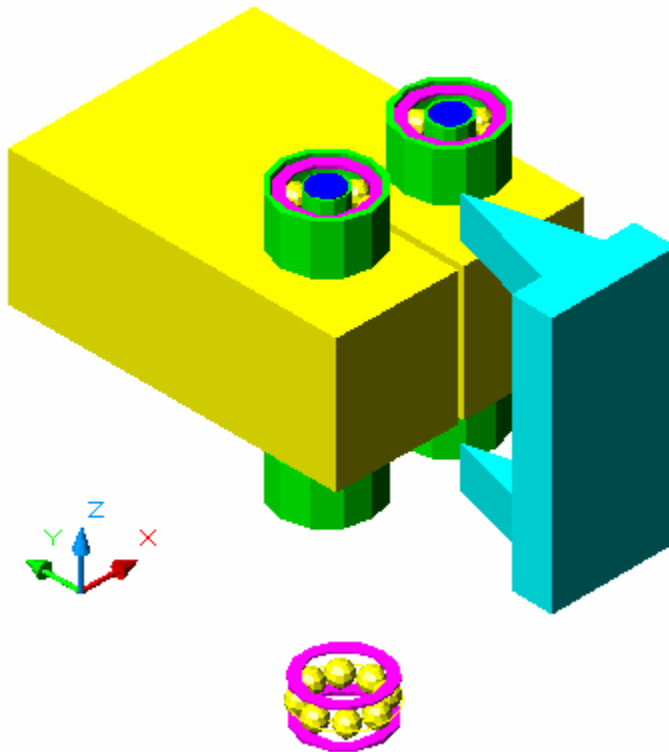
Model showing Specimen along with bearings fitted on steel rods and wedge in loading direction.
